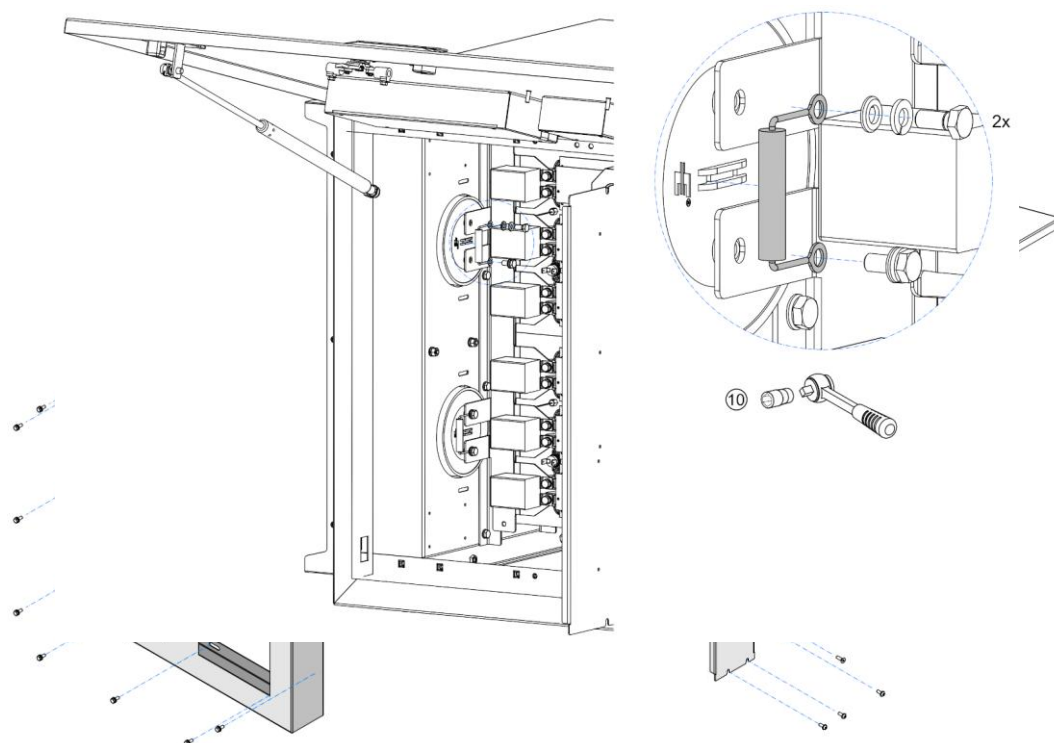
Remove front cover, IGBT protection, left cover and open the electronic panel
